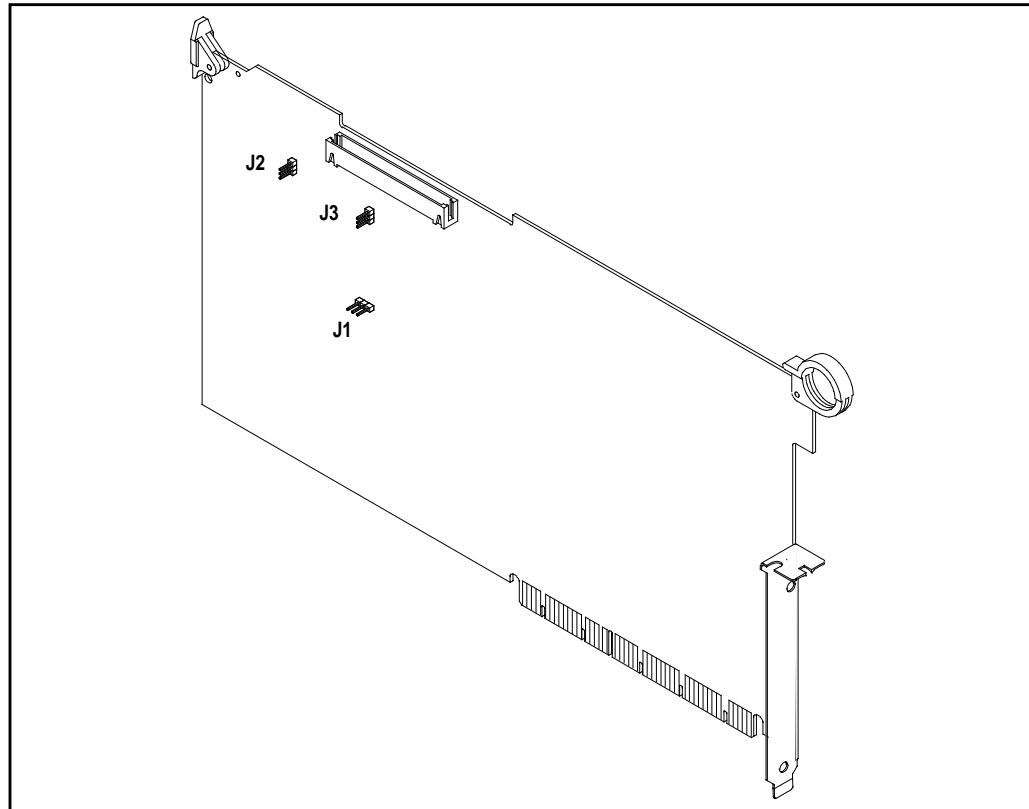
Decoder Circuit Board Showing Plug Jumpers
